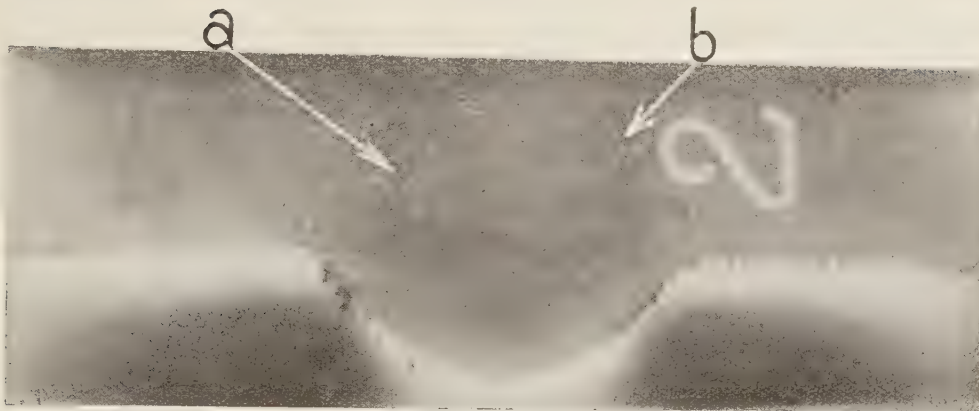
Reproduction of an X-ray film of a thermit-fusion weld.
